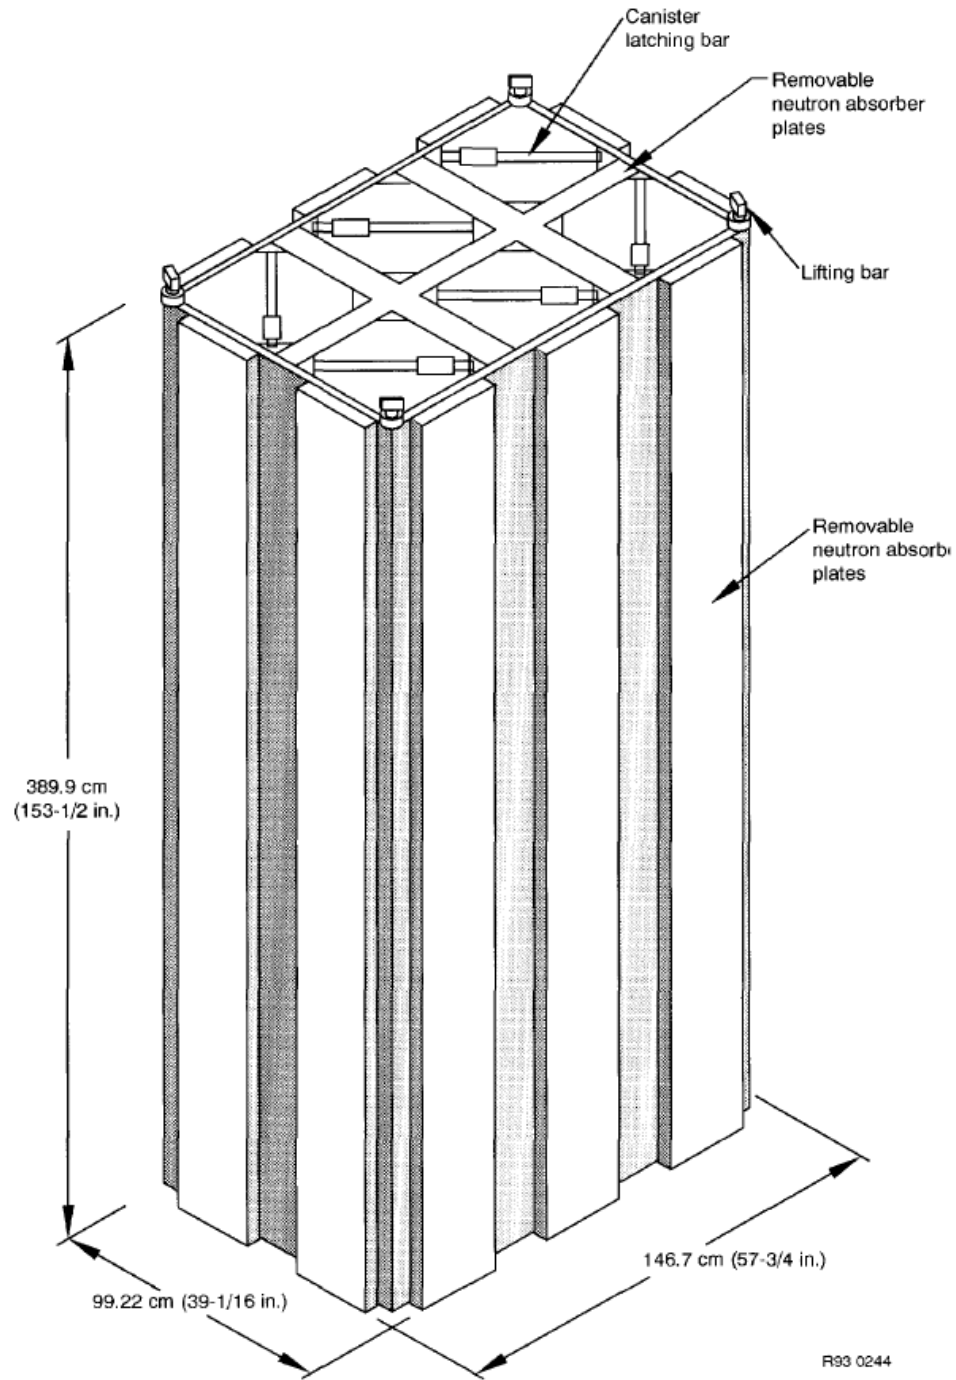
Six-pack canister rack for storage in TAN-607 pool. (Courtesy of INL, 1986)
